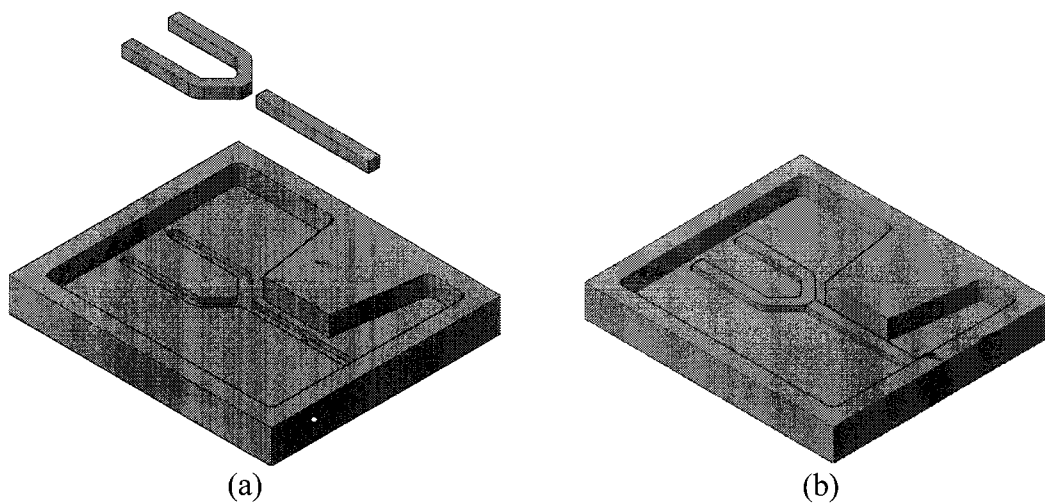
(a) An isometric view of the mold with bent and straight (b) The mold with rod positioned inside the groove
